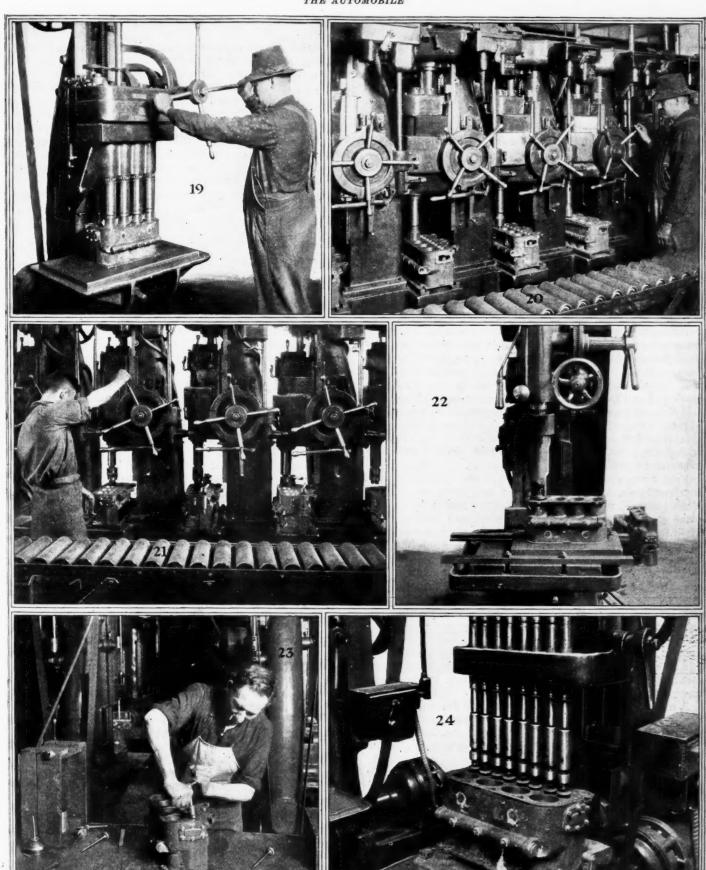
Chamfering the top and bottom of cylinder barrel on a Foote-Burt machine. Fig. 20—Finish reaming the cylinder bores. One bore is reamed at a time on these machines, one operator taking care of eight spindles. Fig. 21—Rolling the cylinder bores to a finished surface. It requires 15 min. to a block to do this work. There is a taper of about 3 deg. on the rolls which is sufficient to run them through the blocks. This rolling operation puts a mirror finish on the cylinder block, slightly compressing the outer skin of the metal. Fig. 22—Baker single-spindle machine for chamfering the connecting rod clearance at the bottom of the cylinder barrel. Fig. 23—Finishing the valve seat by hand. Fig. 24—Grinding-in the valves on a special Foote-Burt valve grinding machine
